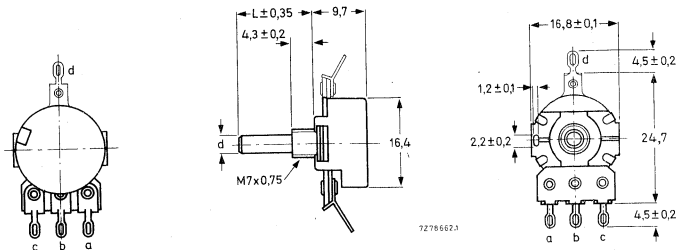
Single potentiometer with mounting bushing. For dimensions d and L, see Spindles.
